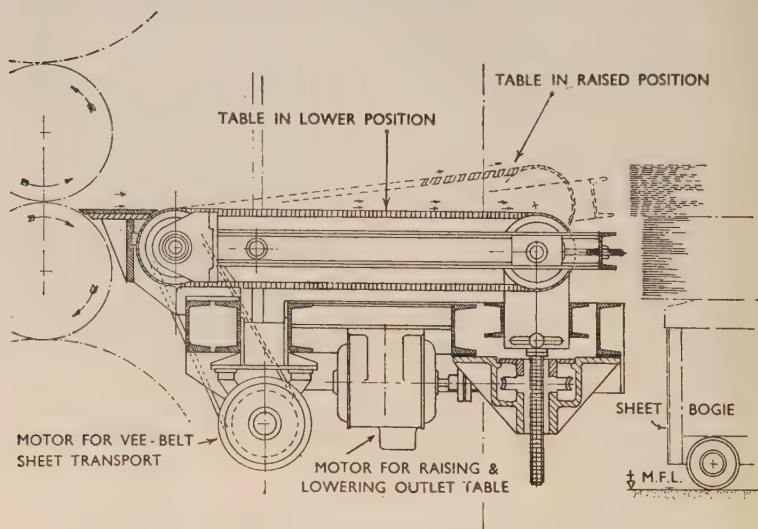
Arrangement of Outlet Table for Four-High Sheet Mill.
